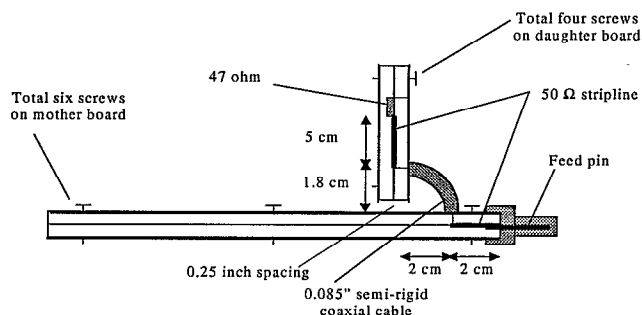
Test fixture geometry for a stripline PCB routing configuration with an ideal semi-rigid cable connection
